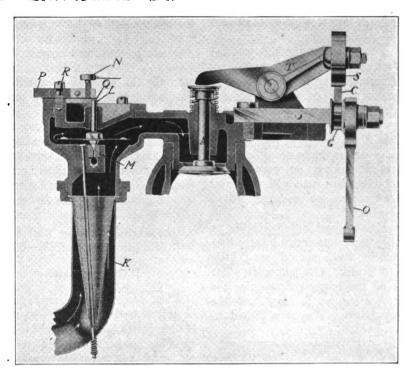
A SECTIONAL VIEW OF THE CADILLAC CARBURETOR
